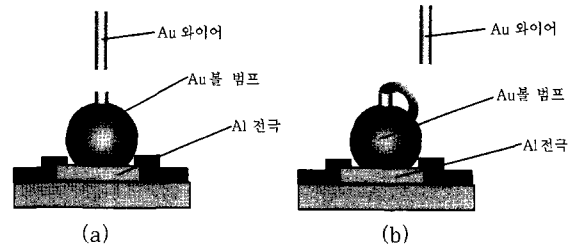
Two methods of wire cutting in ball bumping. (a) wire cutting above the bump (b) wire cutting after bonding on the ball shoulder
